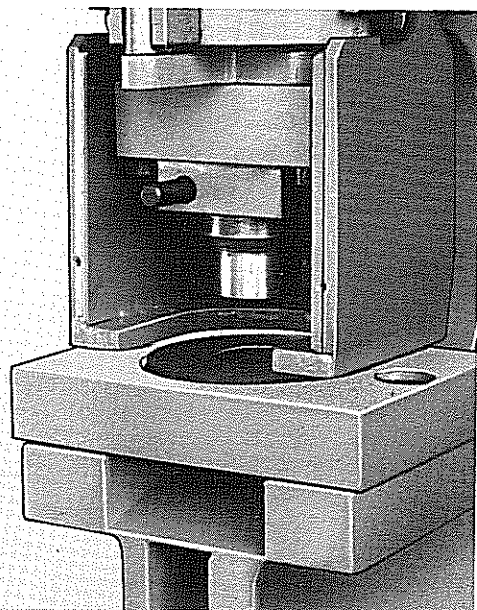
Special punching equipment for accomodating punches and dies exceeding 50.5 to 100 mm cutting diameter
